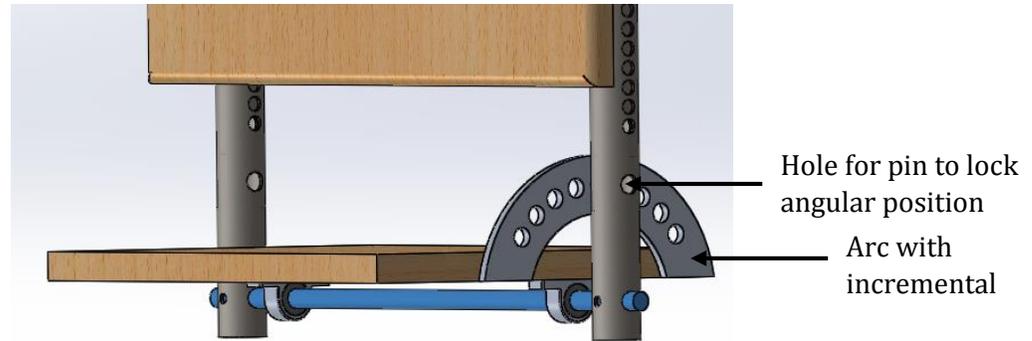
Mechanism used to adjust and lock footboard at different angles.
